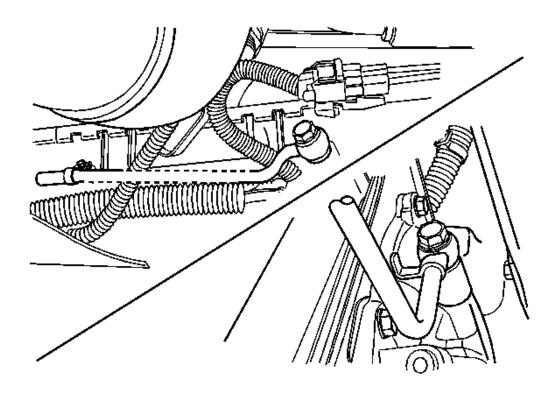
Identifying Improper Joint Seating Courtesy of GENERAL MOTORS CORP.
